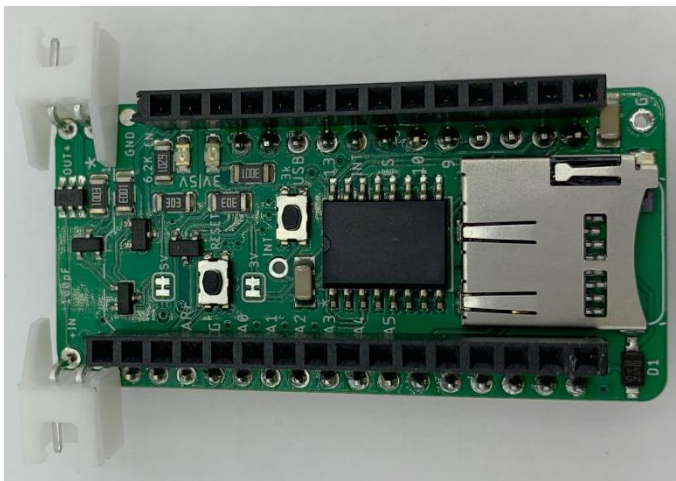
Top of assembled Hypnos PCB with headers and 2 pin right angle JST sockets.
